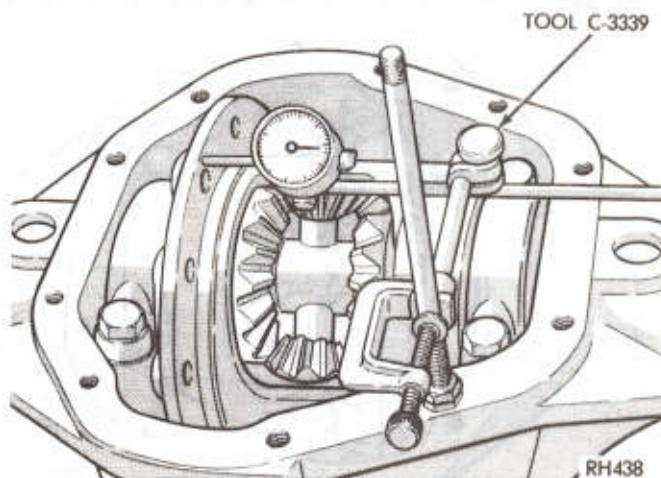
Measuring Differential Case Drive Gear Mounting Flange Face Runout
